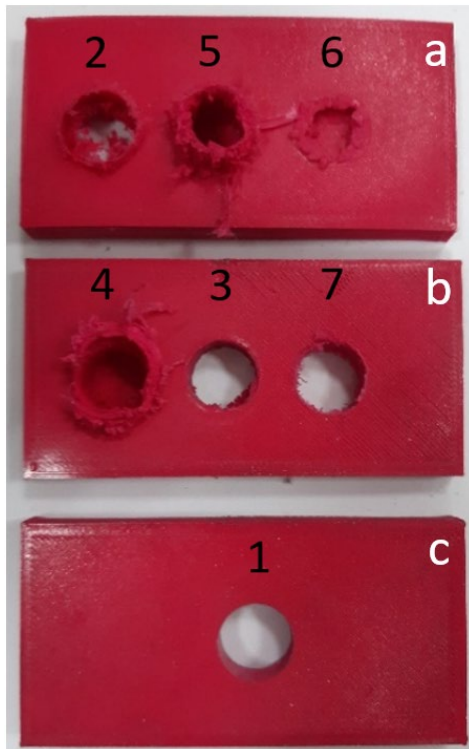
Overview of tested PLA plates processed with 7 different end mill cutting tool samples.
